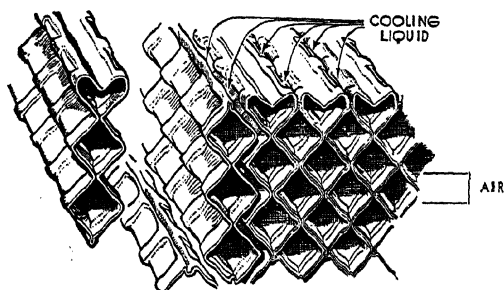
Illustrating method of construction of Galley radiator for liquid-cooled engines and oil coolers.
